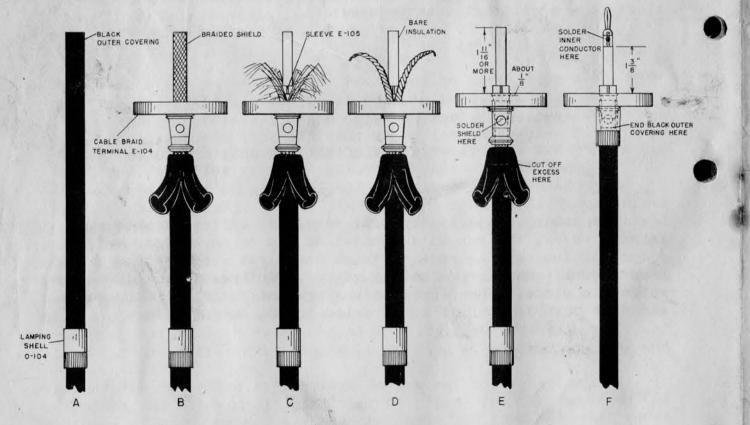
Attachment of RG-8/U Cable to Cable-Braid Terminal and Banana Plug
